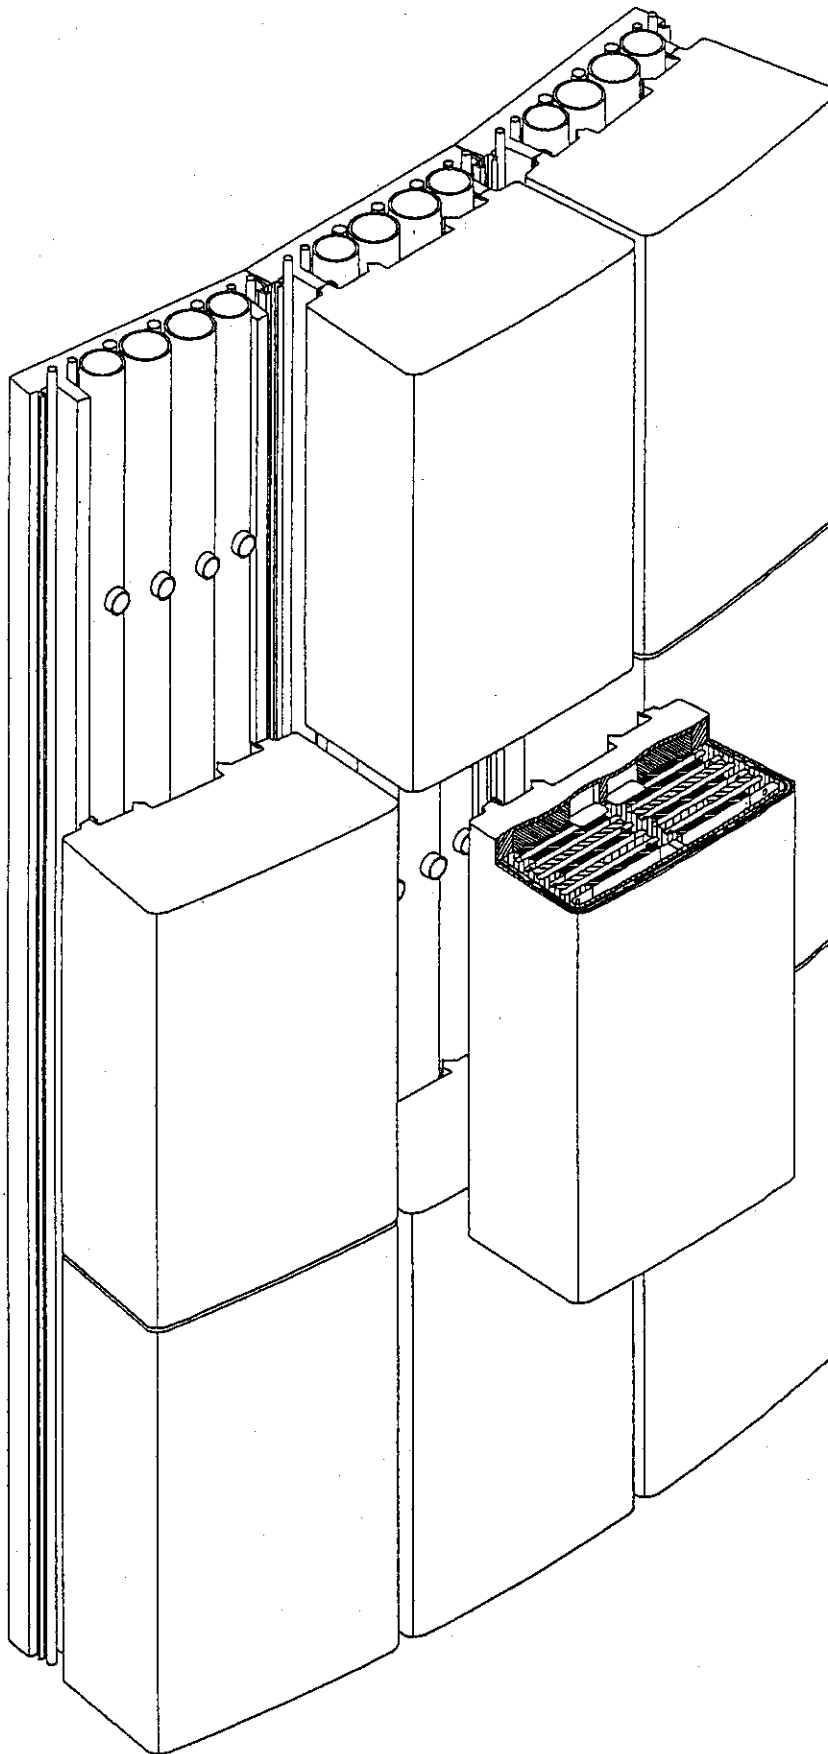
4 A zoomed - up view of a modular shielding blanket.
